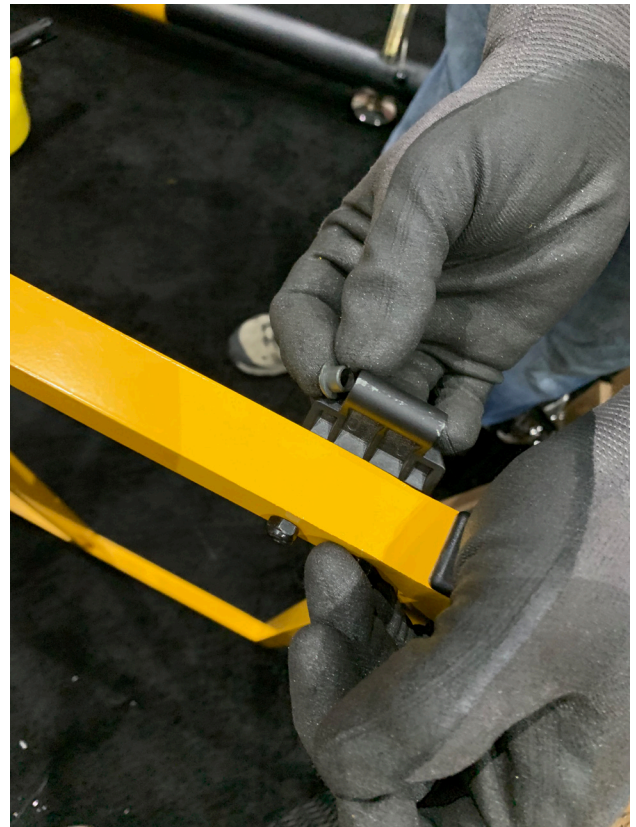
Insert nylon bushings into the hinges on the assembled gate.
